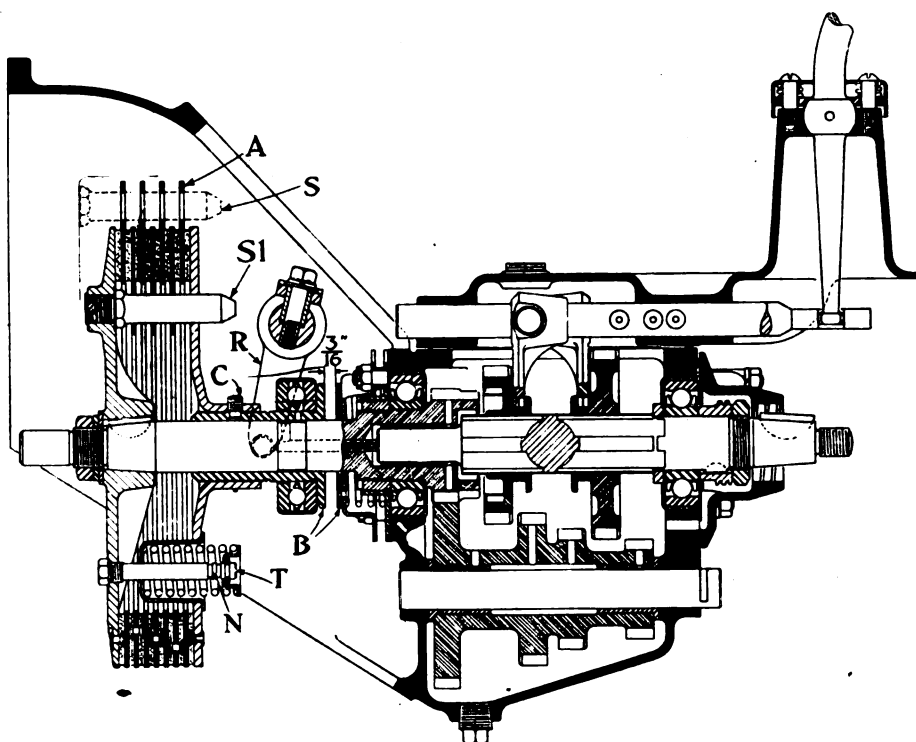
Section through Hupmobile gearset and clutch showing points at which clutch adjustments are made. Note the distance $\frac{3}{16}$ in. between the faces of the clutch brake. This is the correct setting
